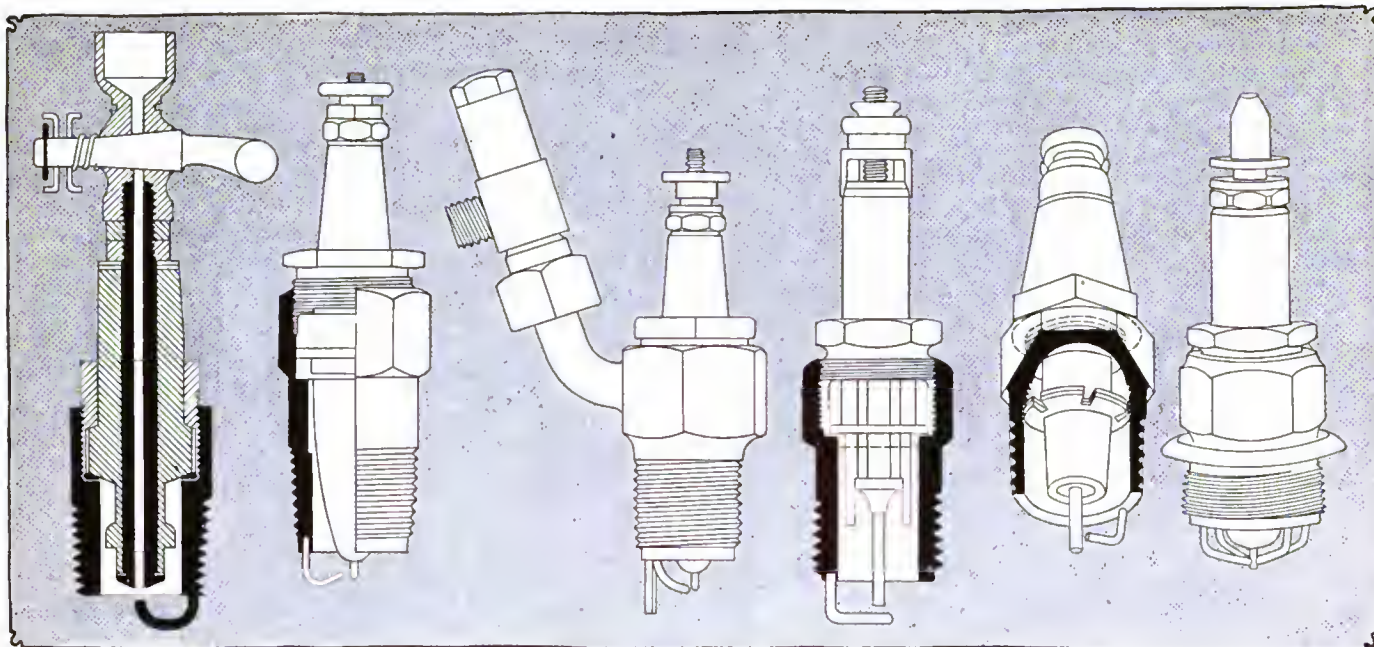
Heco priming. Fig. 2—AC Ford plug. Fig. 3—AC priming type. Fig. 4—MacKee Blitz plug. Fig. 5—Wright. Fig. 6—V-Ray
